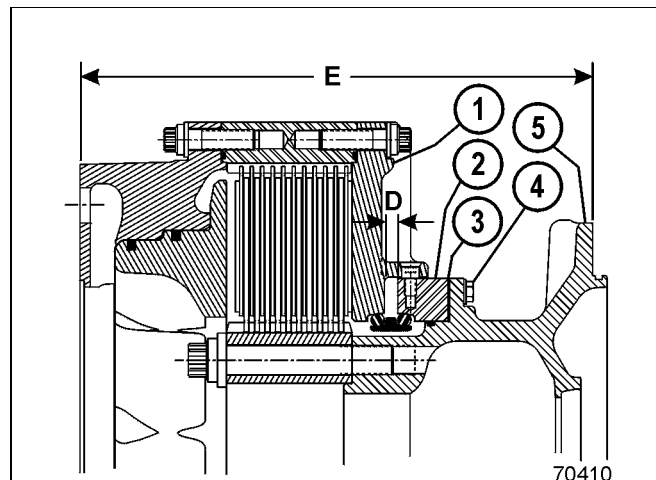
930-2 WHEEL MOTOR SEAL
